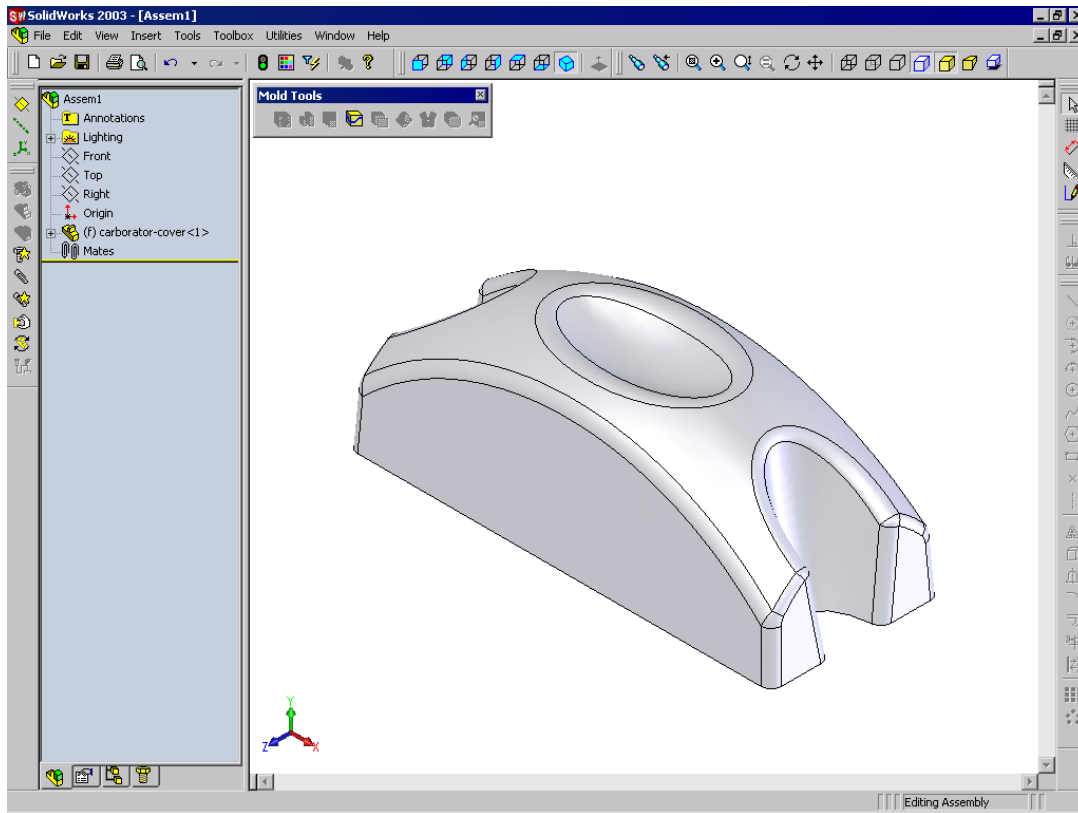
Carburetor Cover placed coincident to the assembly origin
